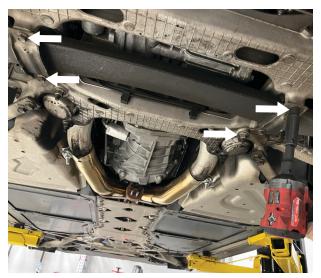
Loosen and remove the 4 leaf spring mounting bolts.
